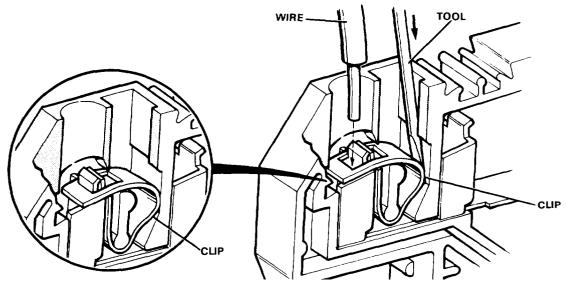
Terminal Strips (sheet 1 of 3) Wires
